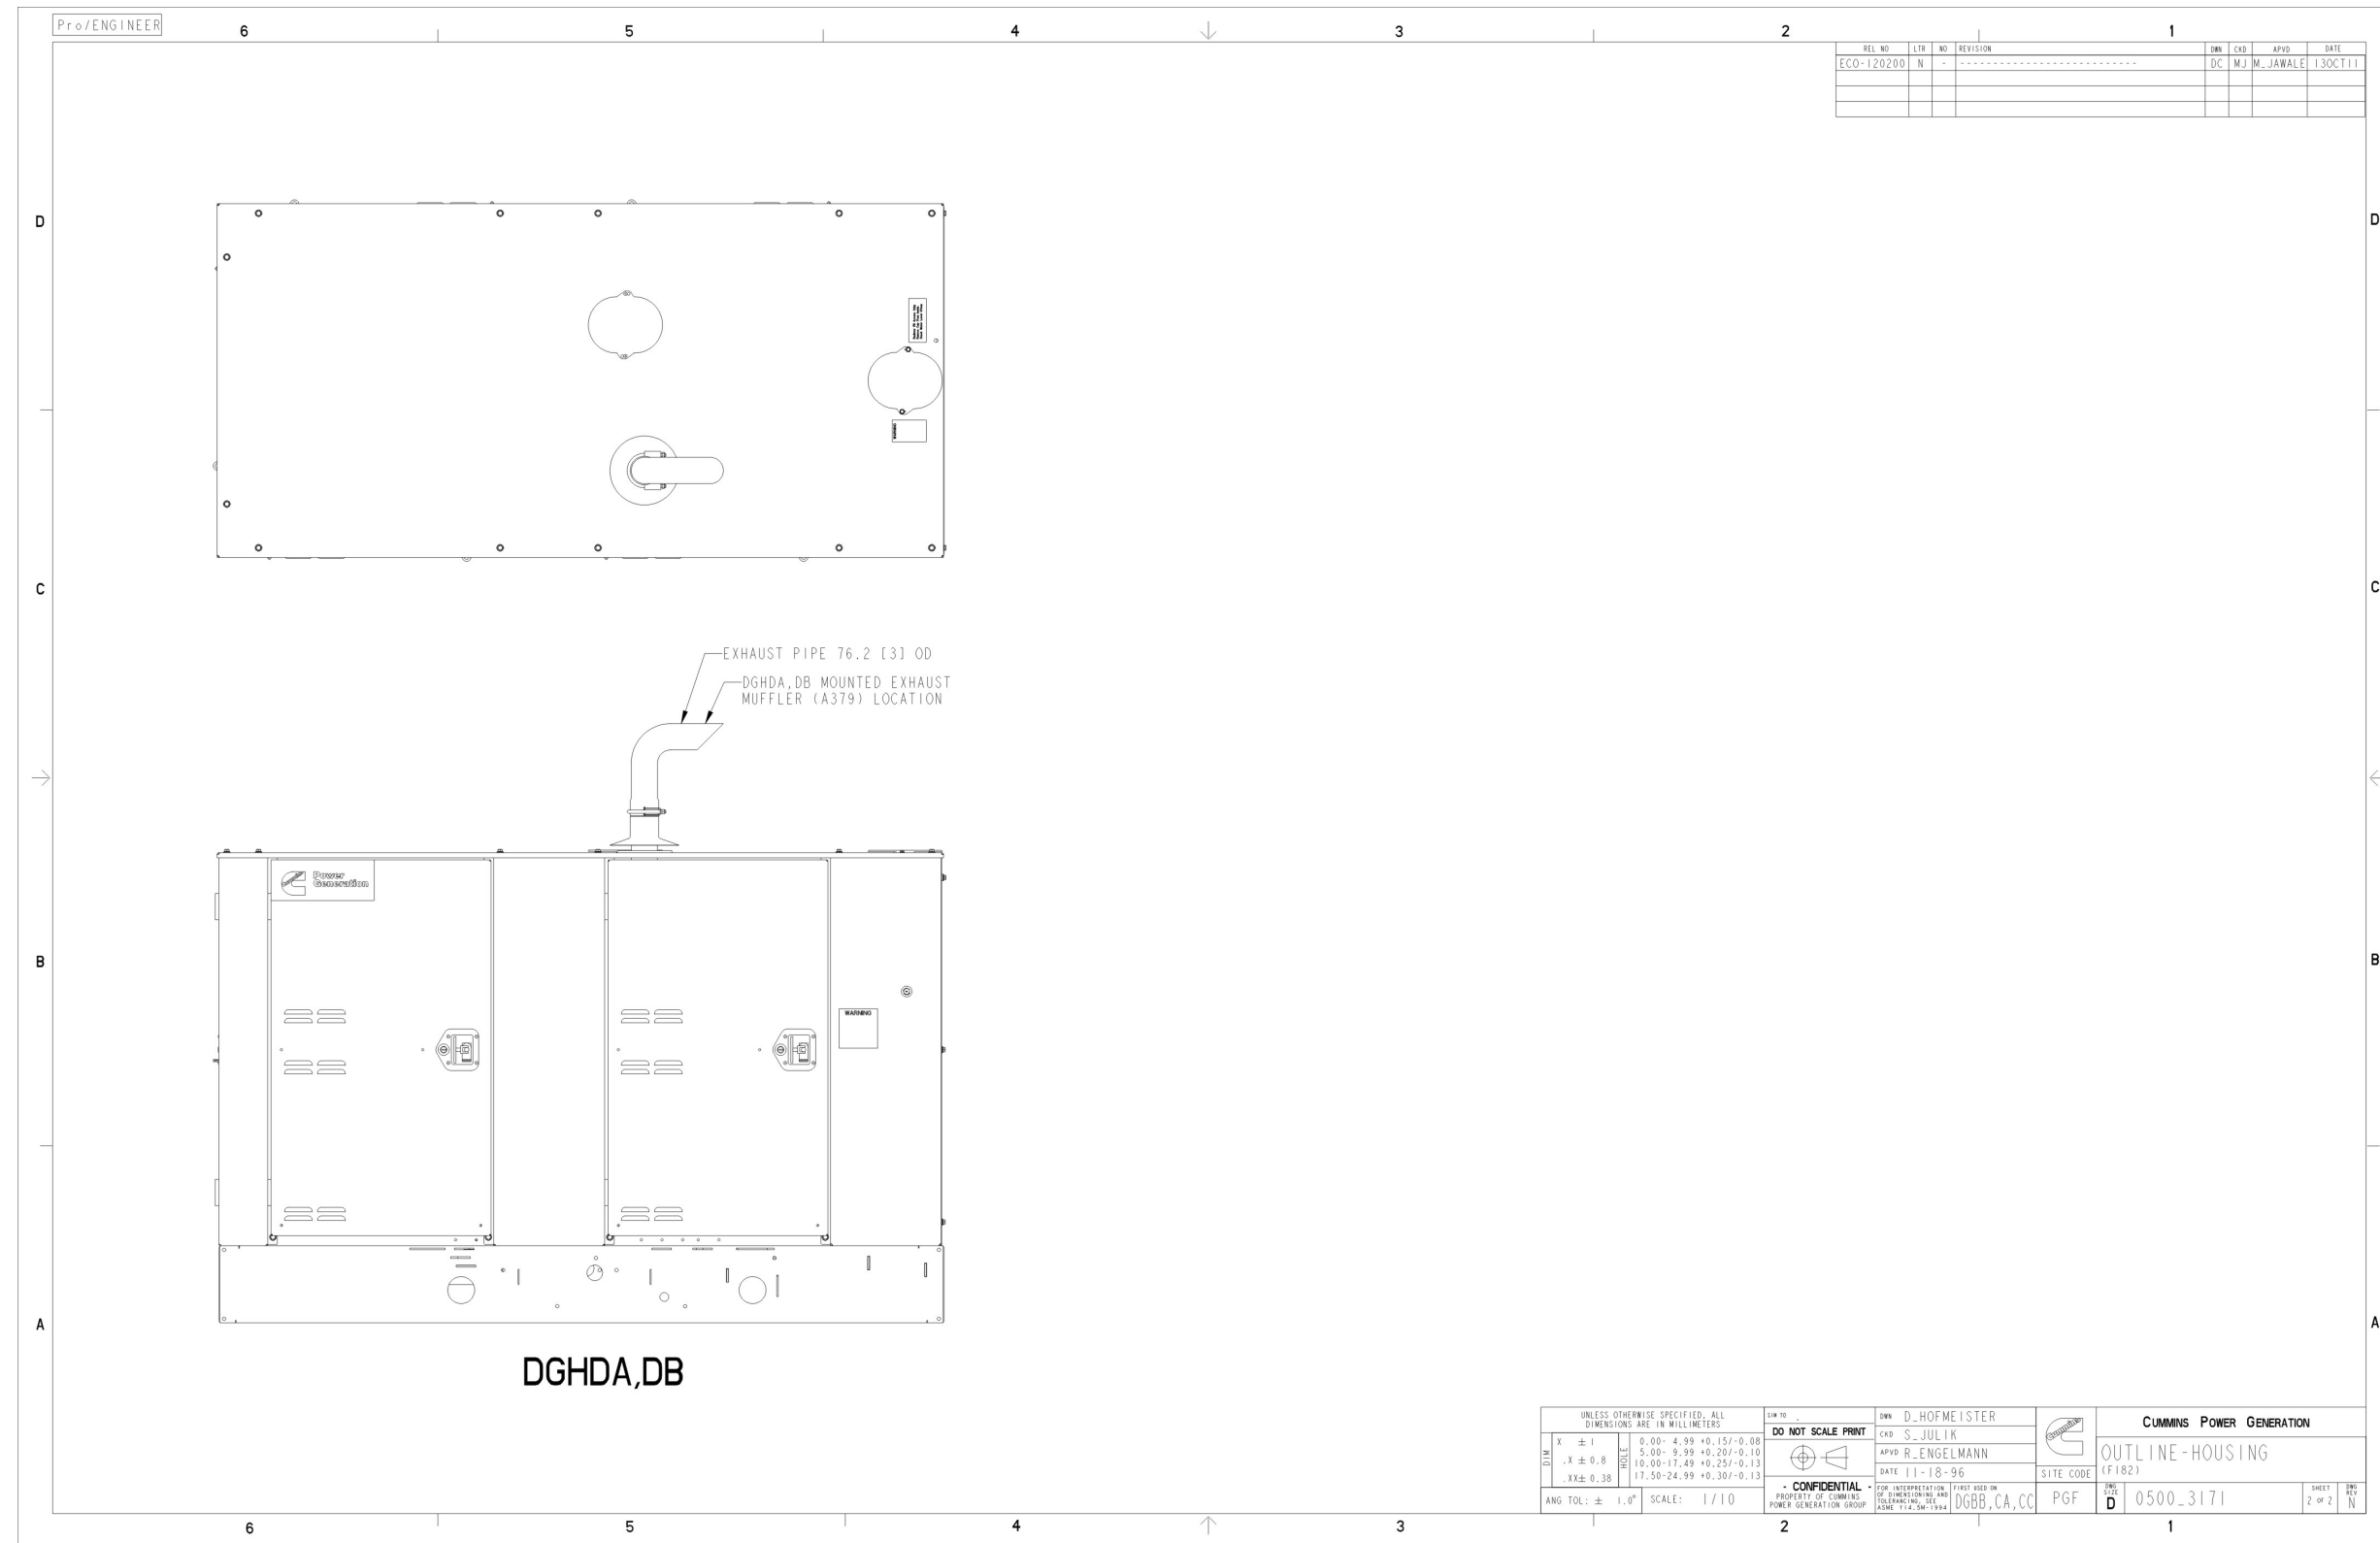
OUTLINE DRAWING (500-3171) SHEET 2
